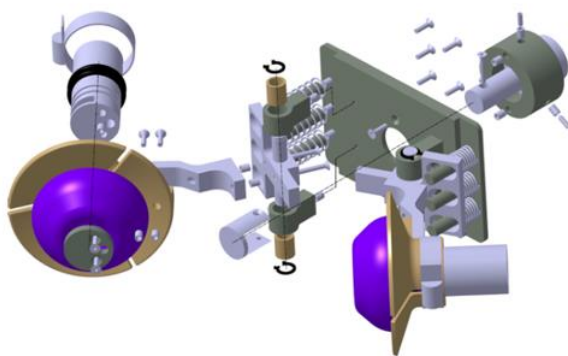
44. Design and prototype of the gripper. Source: Pr. Licht.
